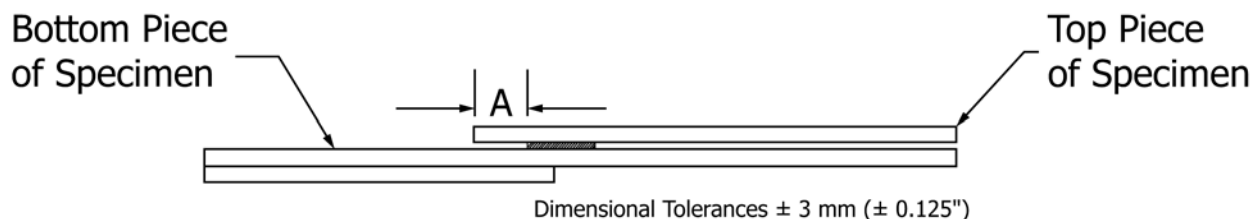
Side View of Multi-Layer Test Specimen—Procedure A
